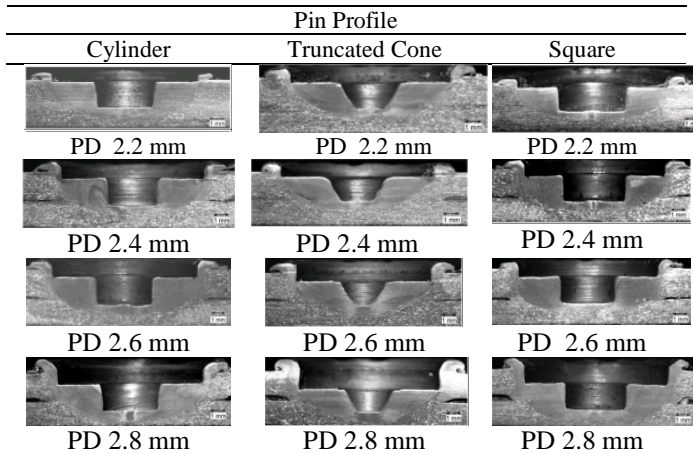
Macrographs of friction stir spot welded joints under variation of tool plunge depth (PD) and pin profile
